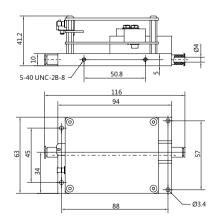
Outline drawing of DPS series driver with general purpose pad
